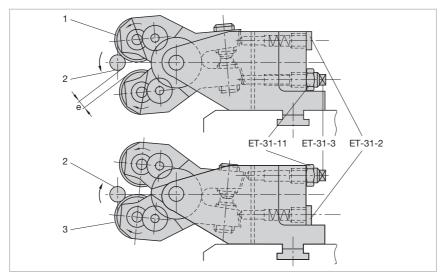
Adjusting the pendulum clearance with a spring-loaded bolt
